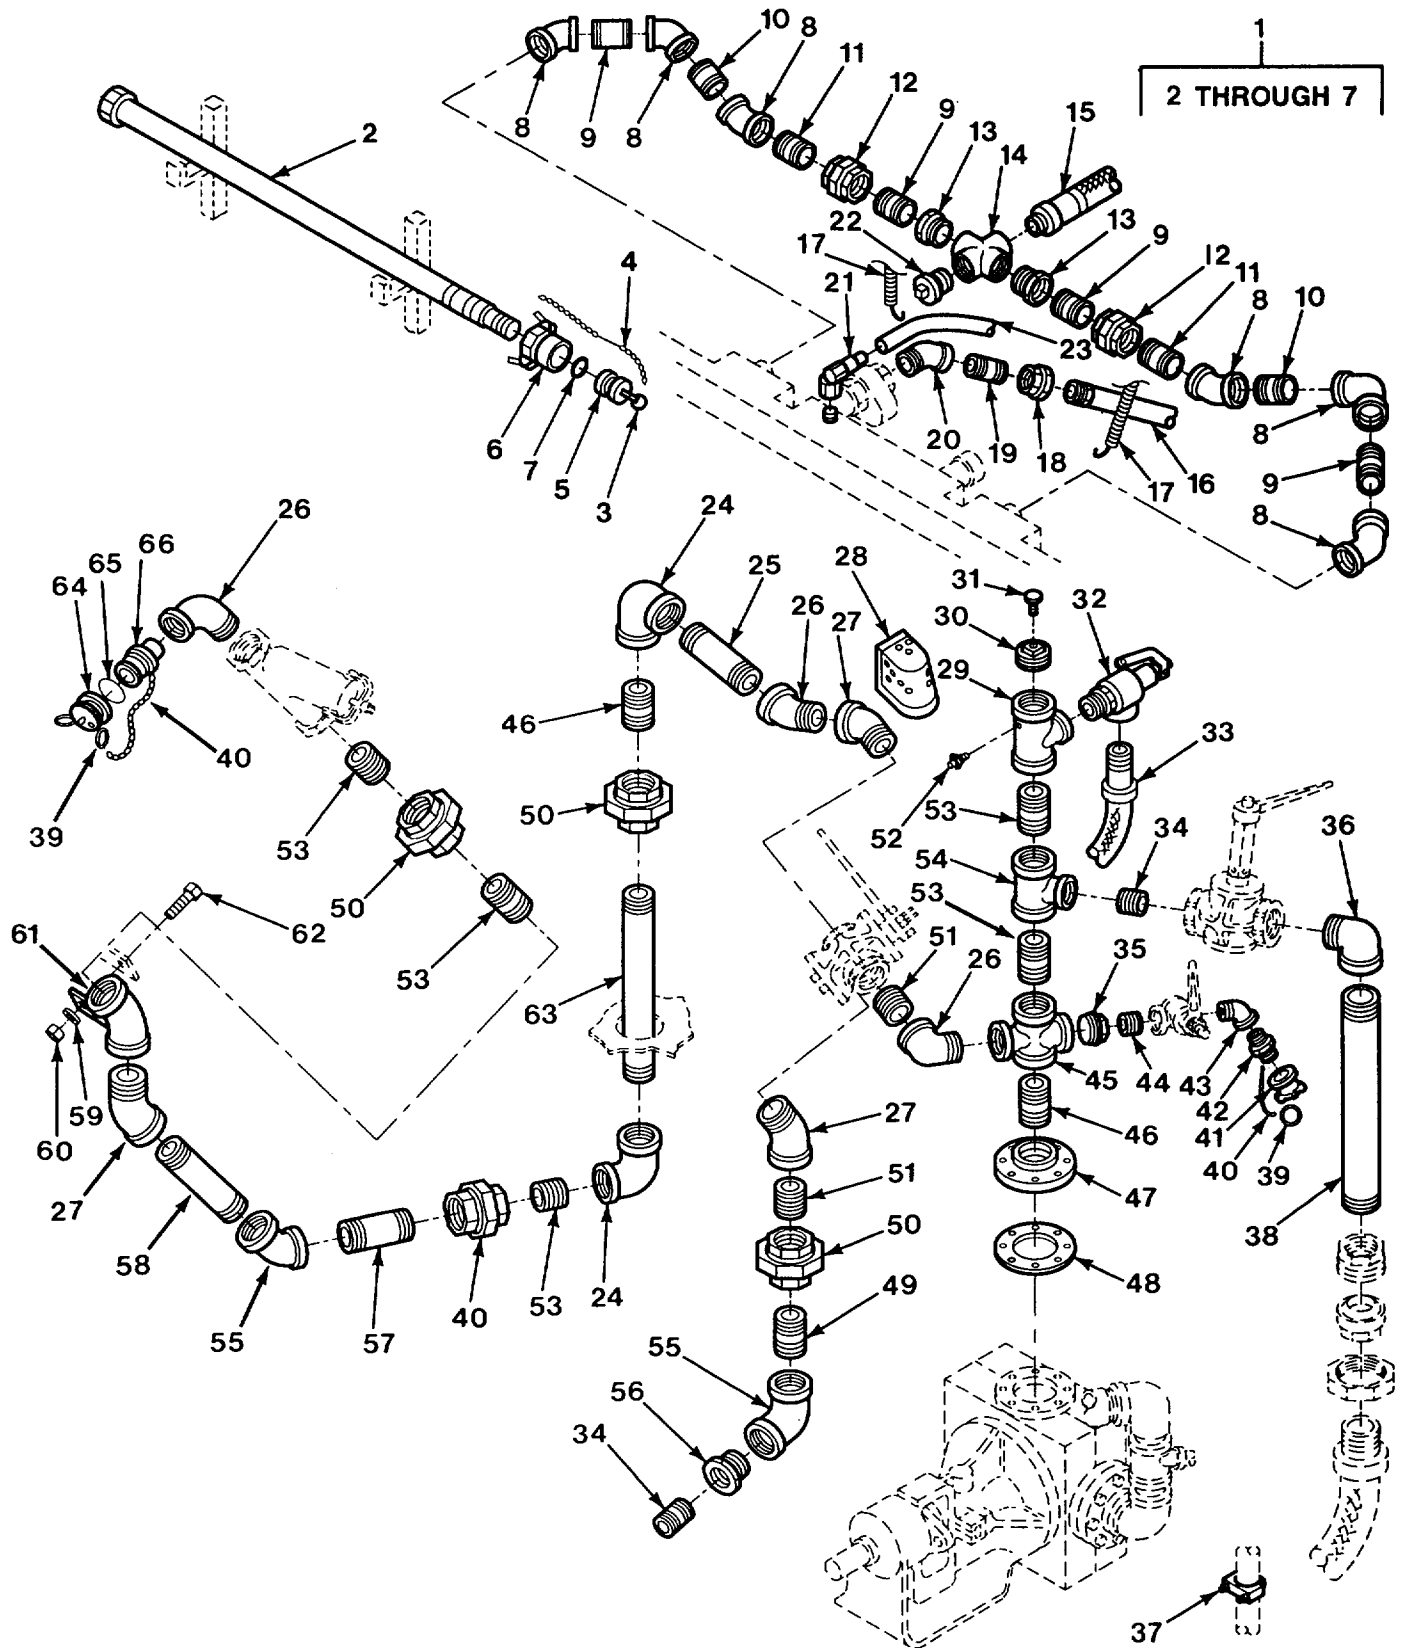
BITUMEN PIPES AND FITTINGS (SECTION ONE)
